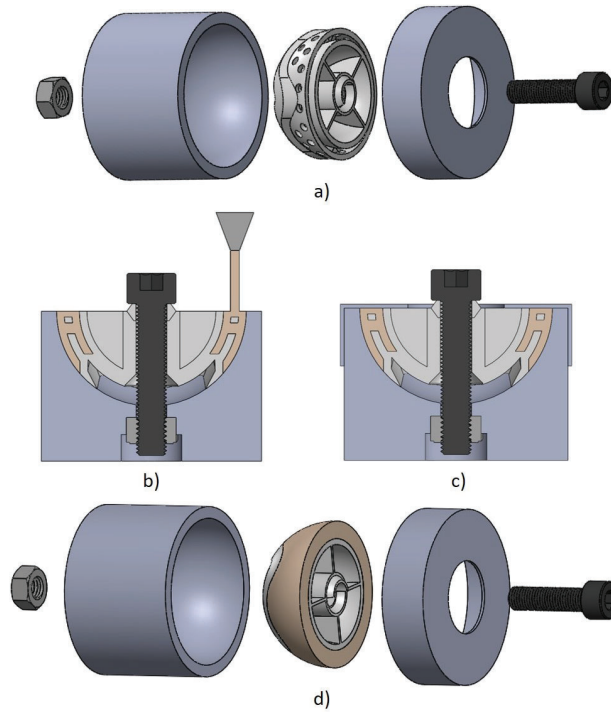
Molding process for creating a soft-surface sphere half. Subfigure a) displays the assembly of molding components for a soft sphere half. Subfigures b) and c) present the deposition process, where elastomer material is injected into the cavity of the mold and then sealed to achieve the required outer surface. Subfigure d) shows the disassembly after the elastomer material has been cured.
